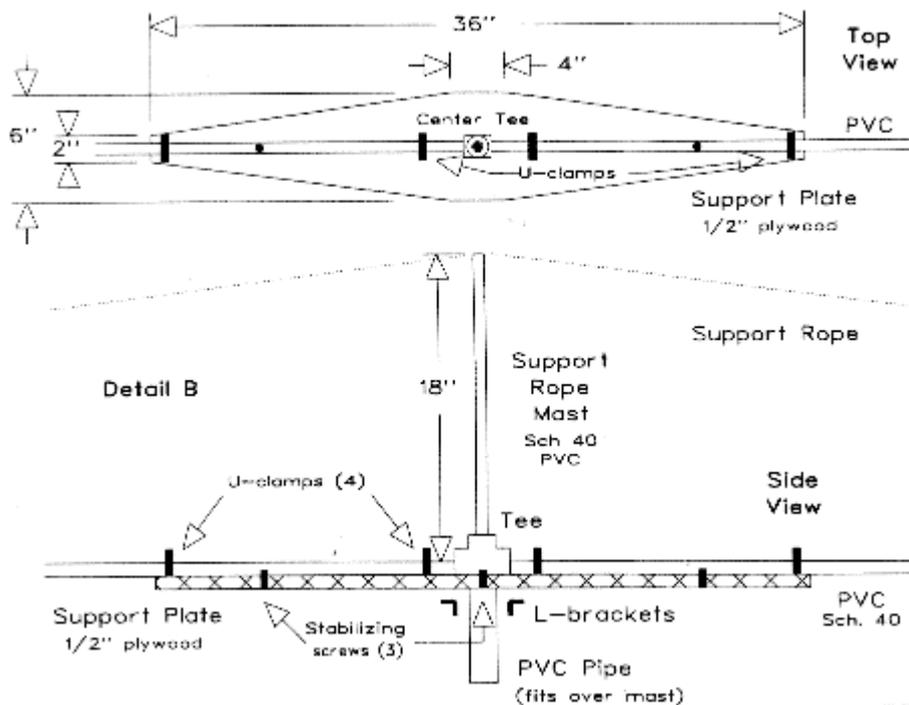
Detail B of the support structure, showing the center plate and mast connection.
